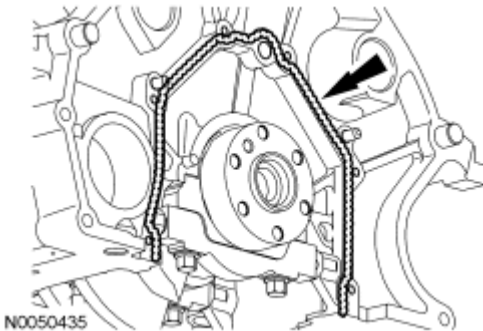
Applying Bead Of Gasket Maker To Rear Crankshaft Seal Retainer
